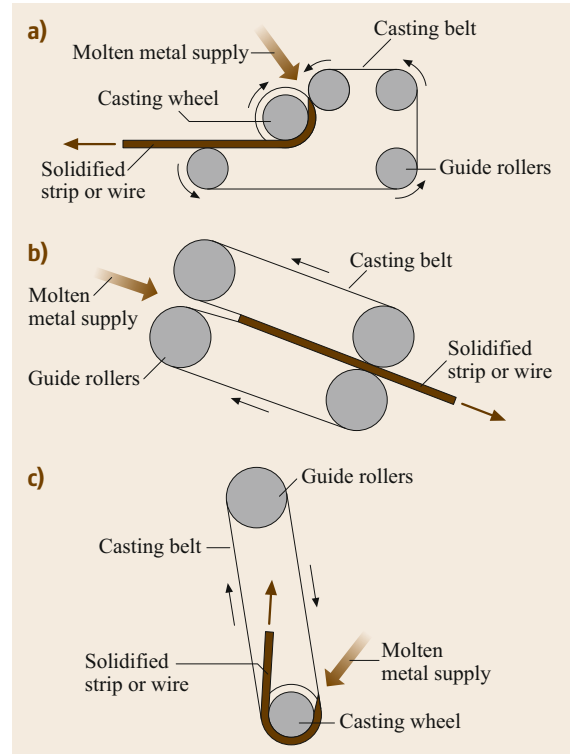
c Casting machines: (a) strip casting machine (rotary process), (b) strip casting machine (Hezelett process), (c) wire rod casting machine [10.1]
